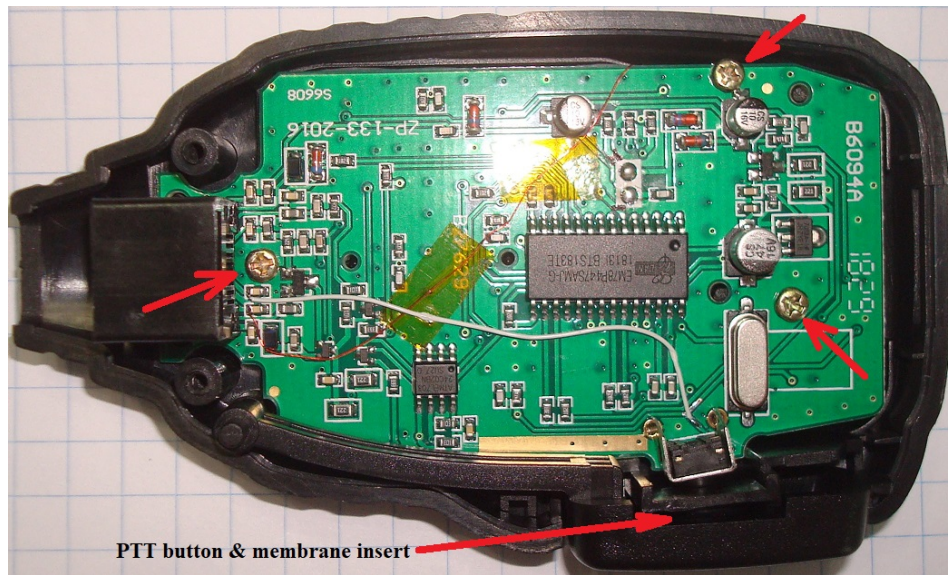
Main PCBA for the HM-133. Three (3) screws hold the circuit board in place.
